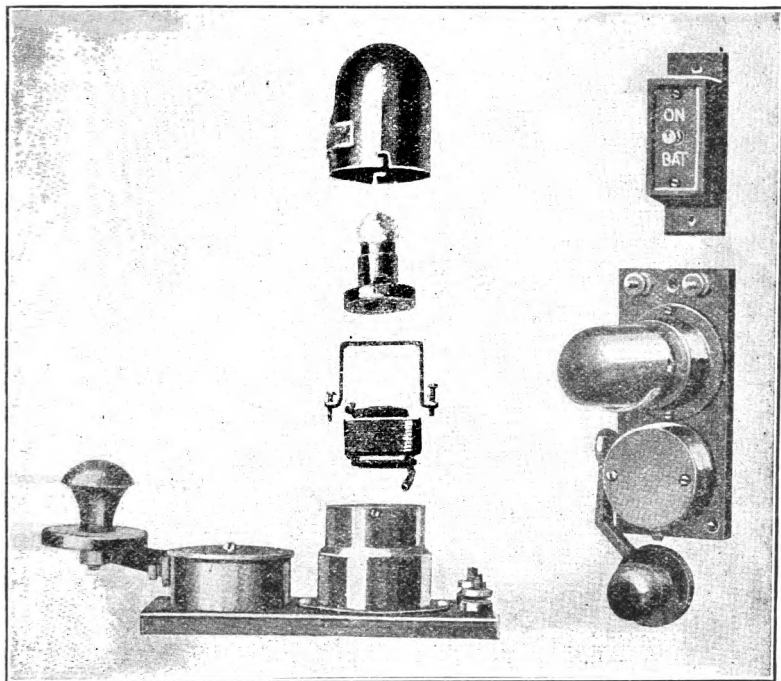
The flame-proof key and the winker light and transformer mounting.
